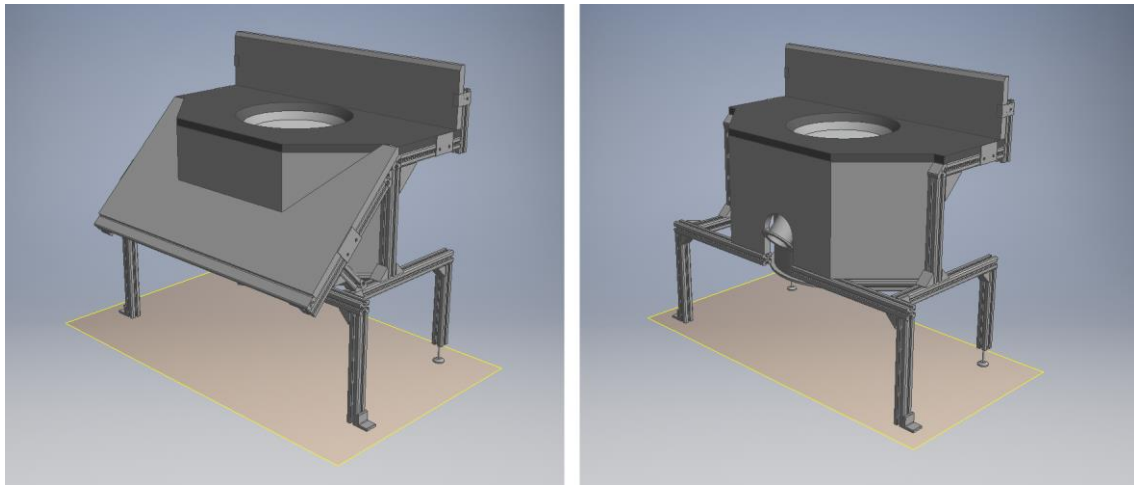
Radiation Shield CAD drawings. Left: initial version. Right: final configuration.
